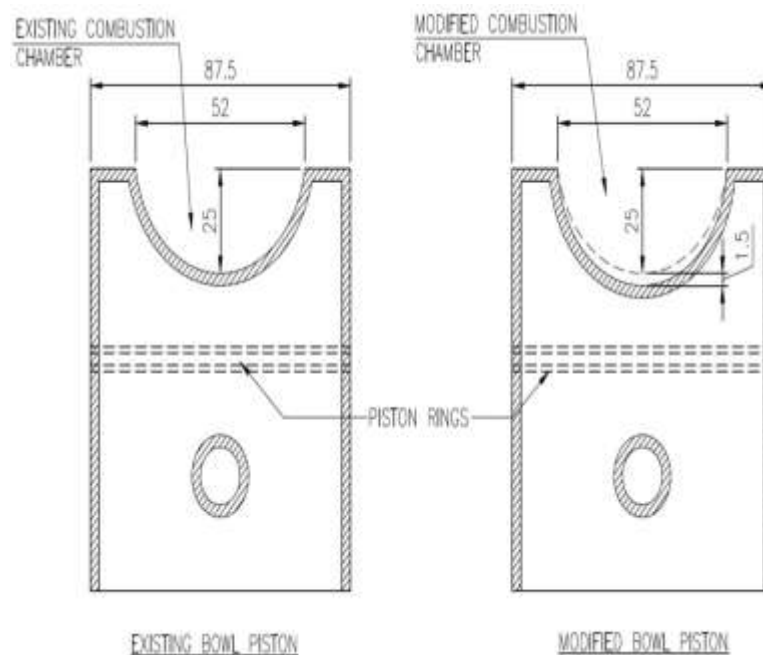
Dimension details of existing bowl piston and modified bowl piston.
